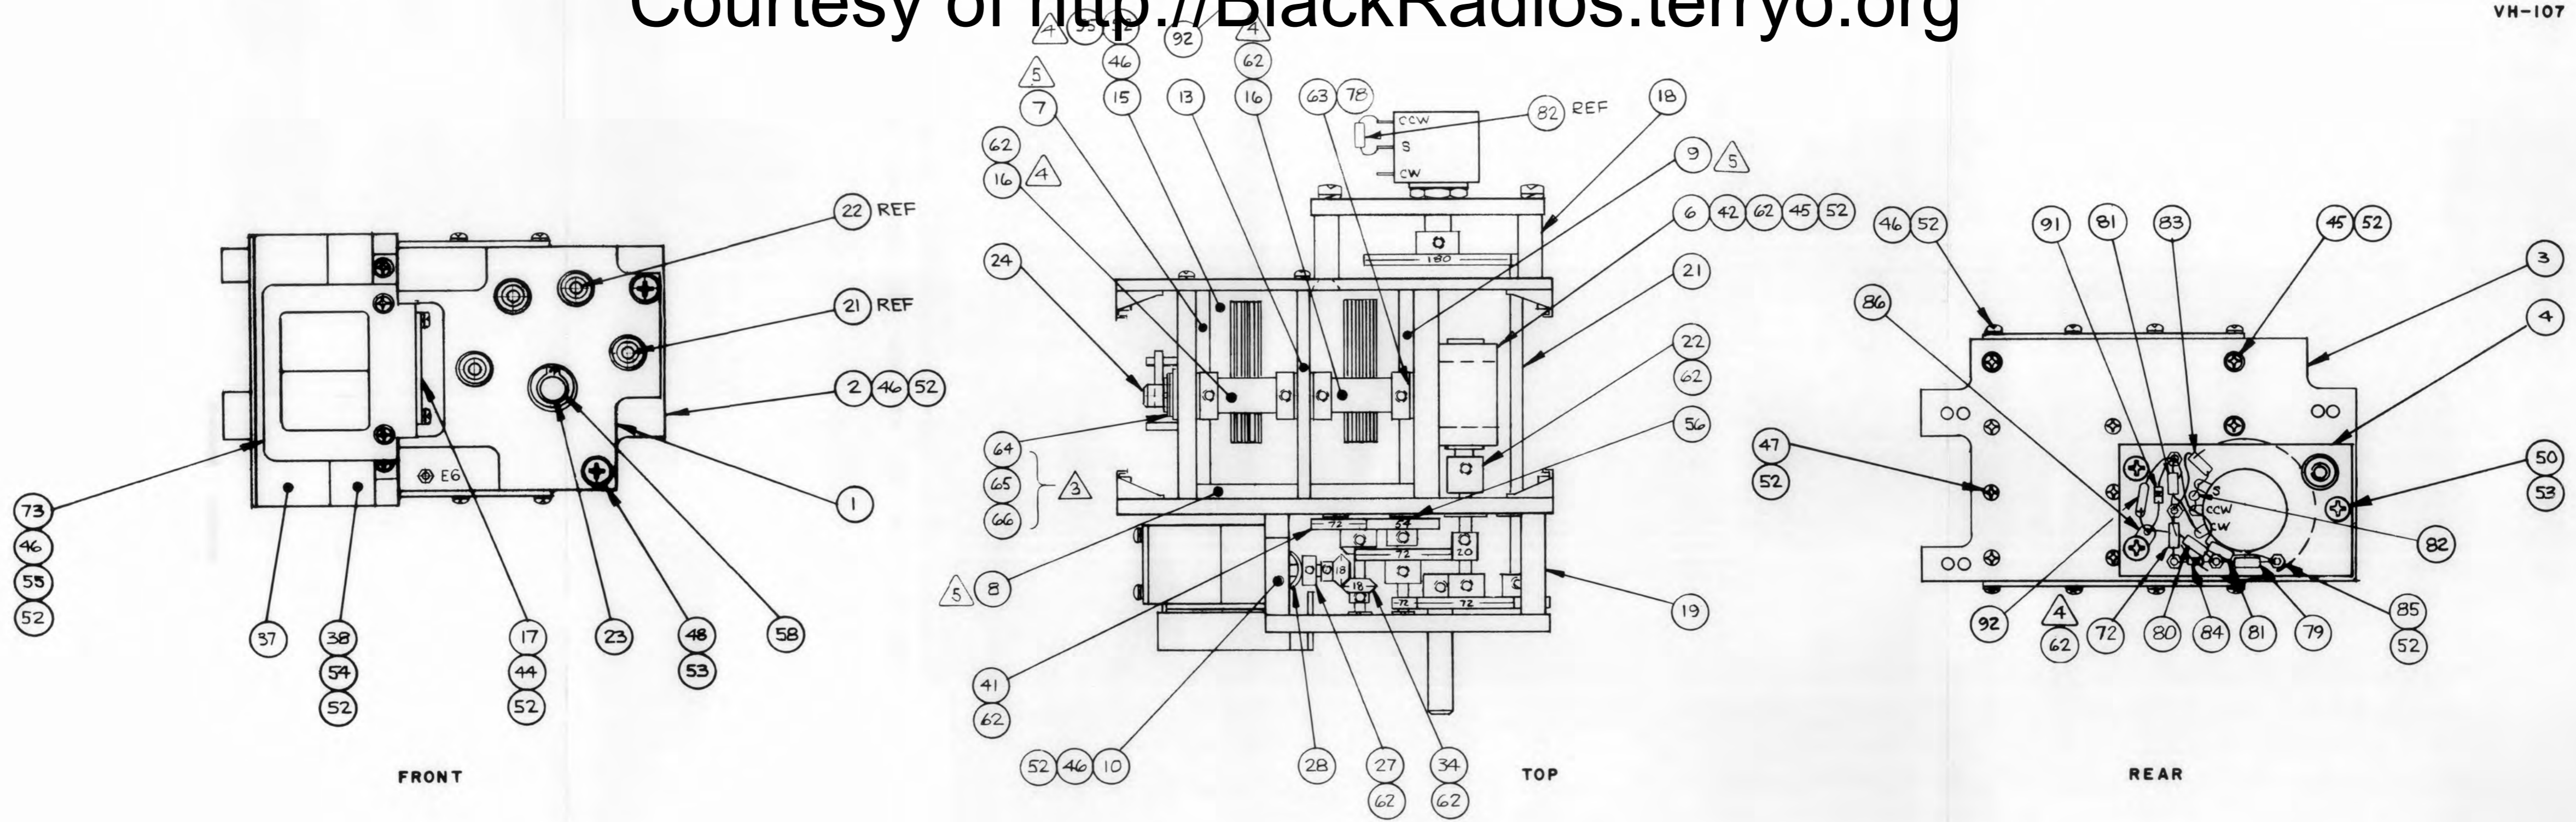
Type 7794 Oscillator Gear Train (A3), Location of Components, Part I, 43663
